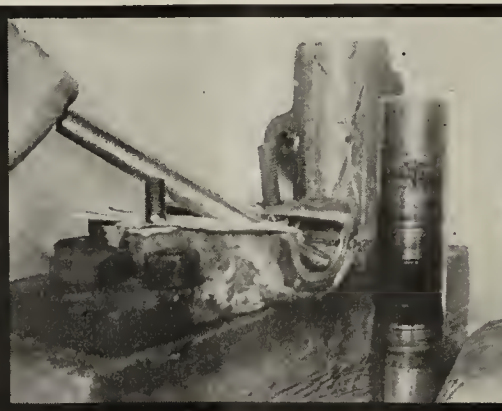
Scraping Bearing for Correct Bearing Surface.
